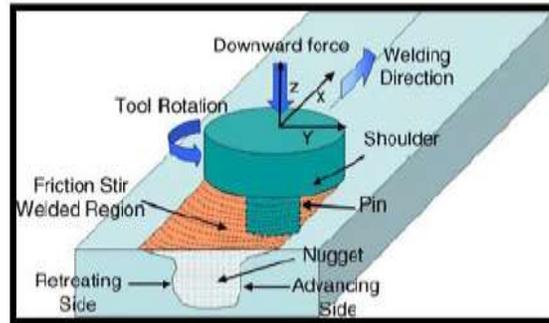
Schematic illustration of Friction Stir Welding⁹.
